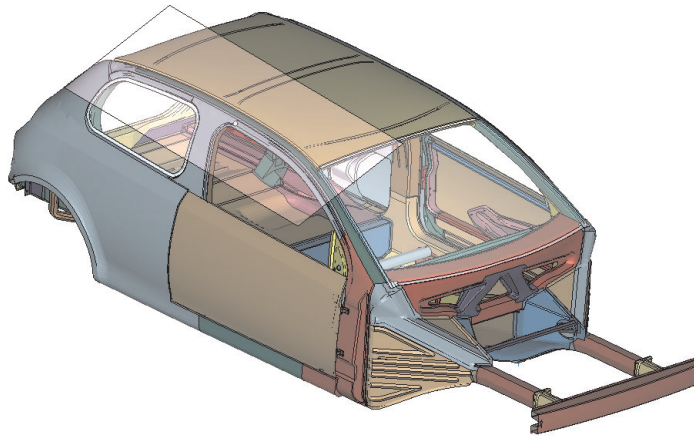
C-Class Roof Crush / Rollover undeformed shape
